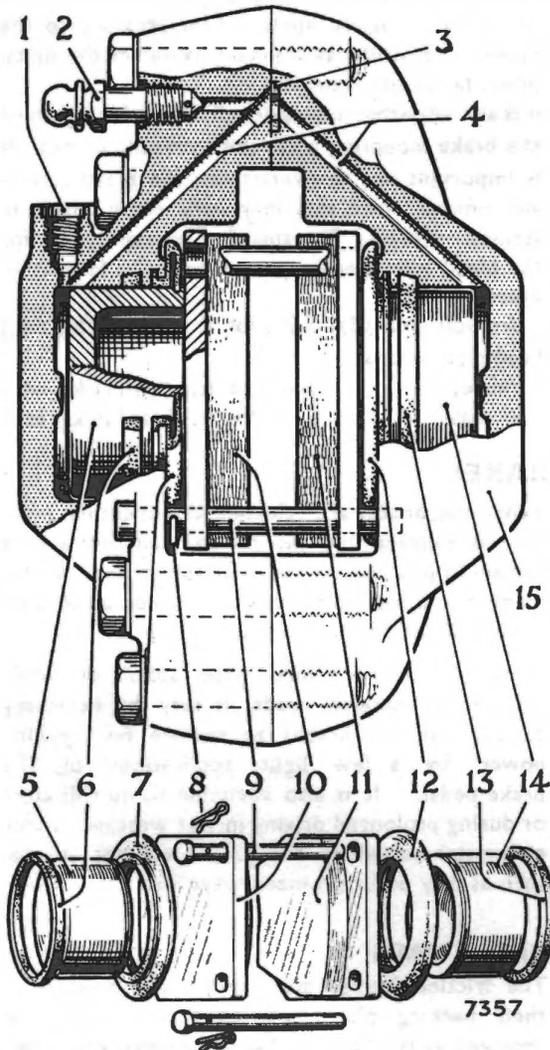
Exploded view of caliper assembly, Series II models onwards.
